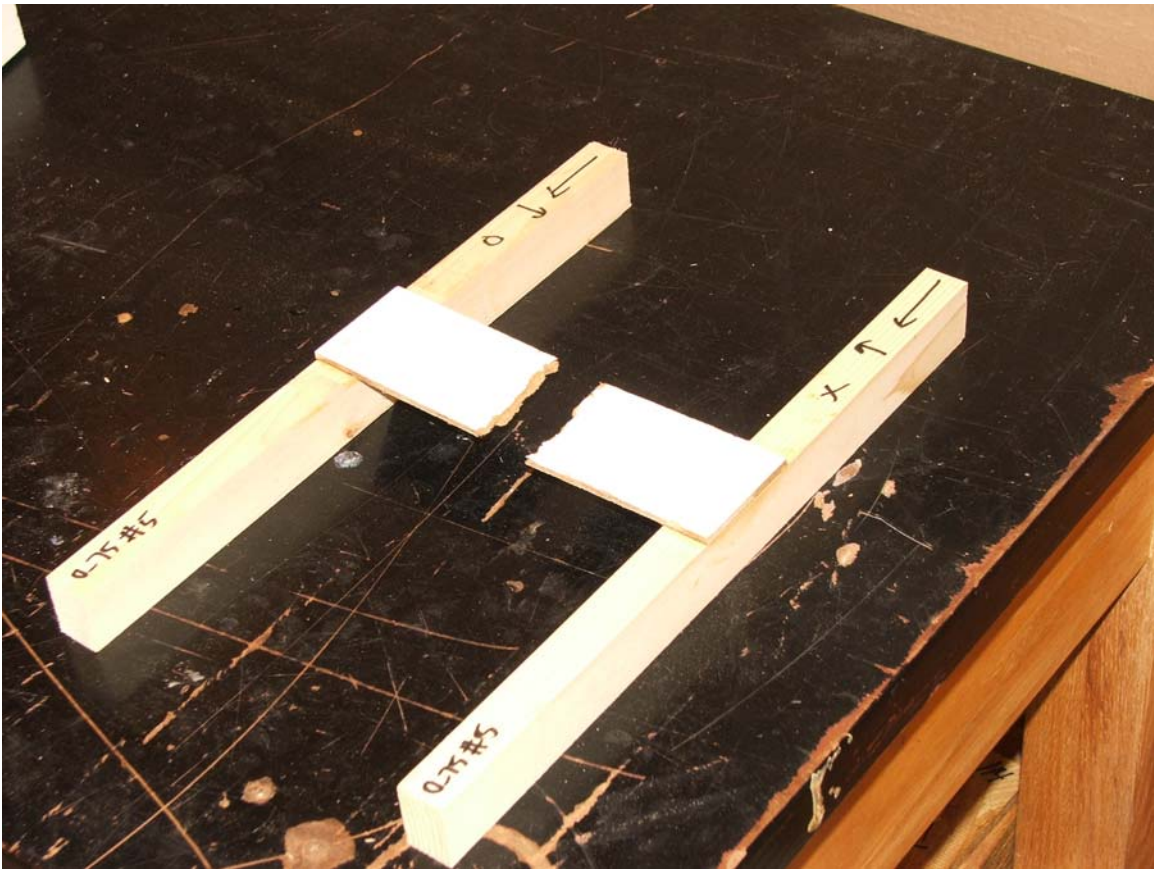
Failed Glued Bending Test Specimen with Stile Width of 3/4 in.
